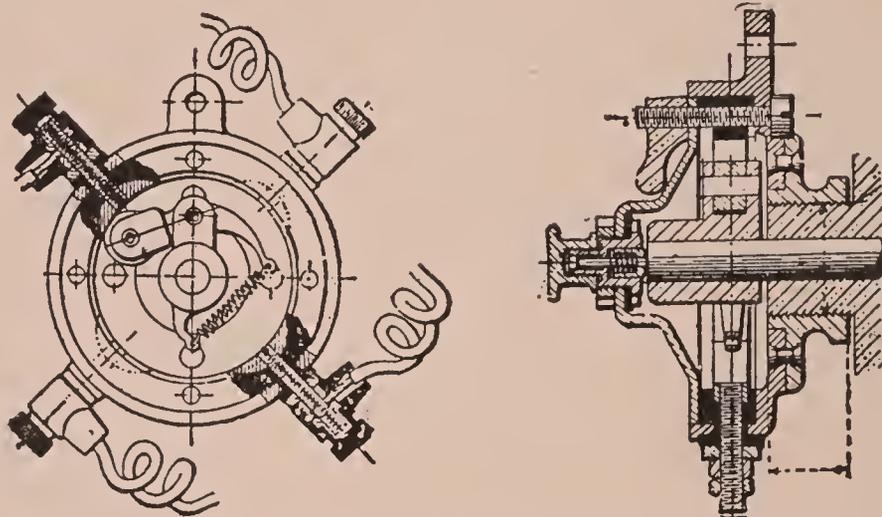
Timer of the Roller type for a four-cylinder Motor.
